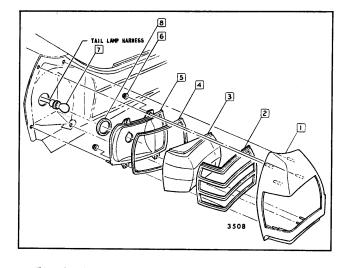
Tail Lamp - Beaumont (Canadian) Styles
